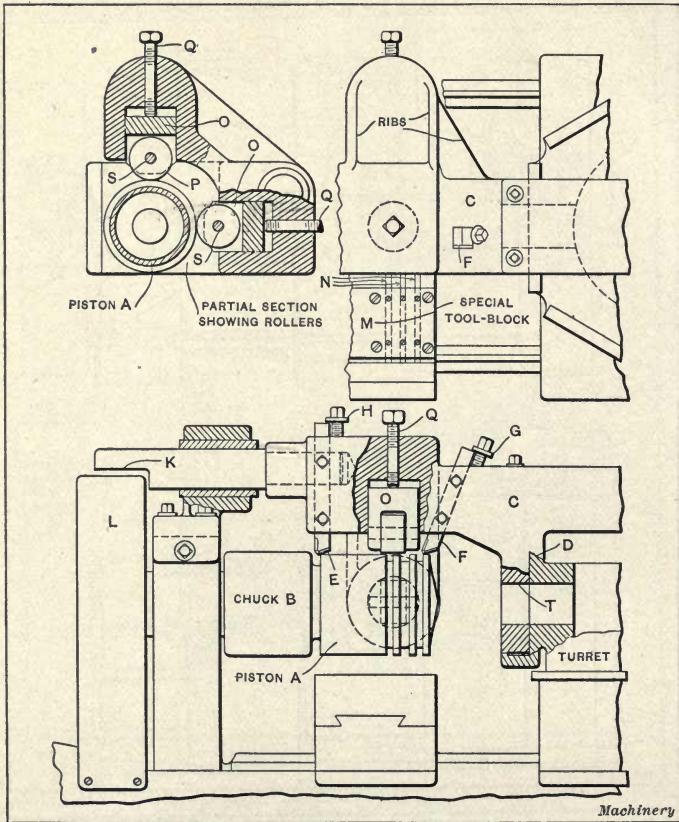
Multiple Turning Tool equipped with Pilot and Roller Back-rest
